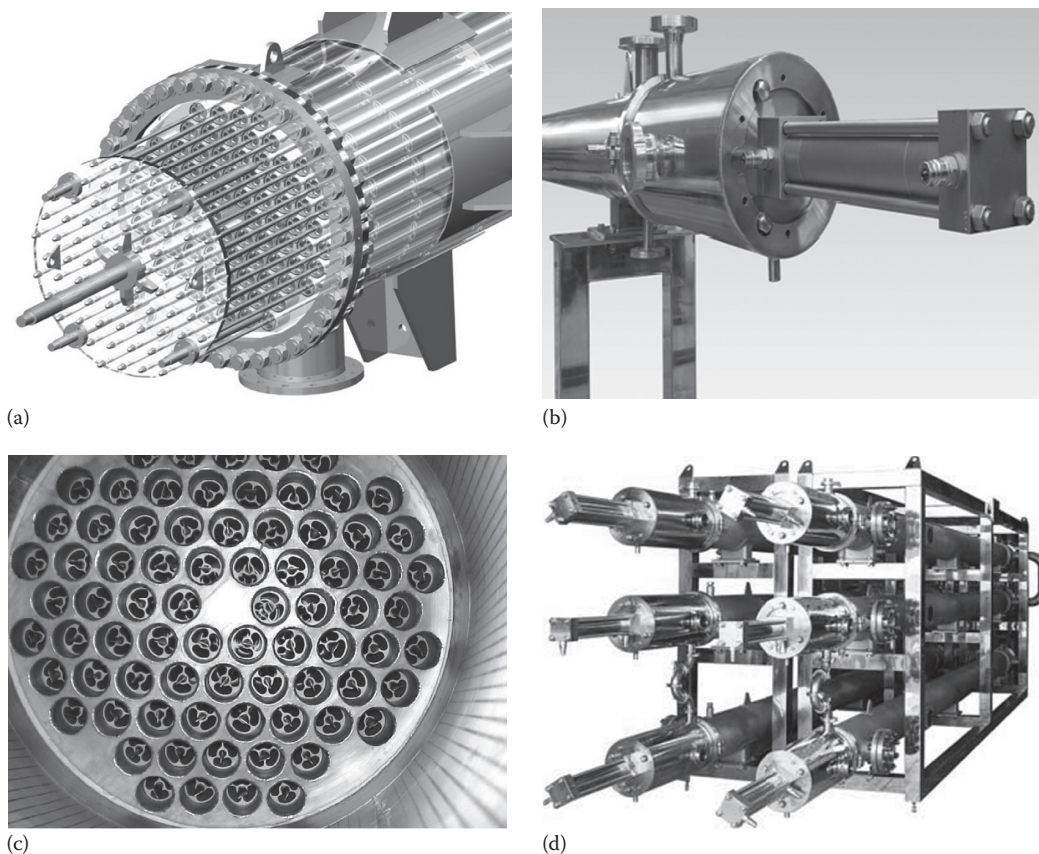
Unicus dynamic scraped surface heat exchanger. (a) 3-D model, (b) hydraulic cylinder head, (c) a unit of Unicus, and (d) multiple Unicus units. (Courtesy of HRS Heat Exchangers Ltd, Herts, U.K.)
